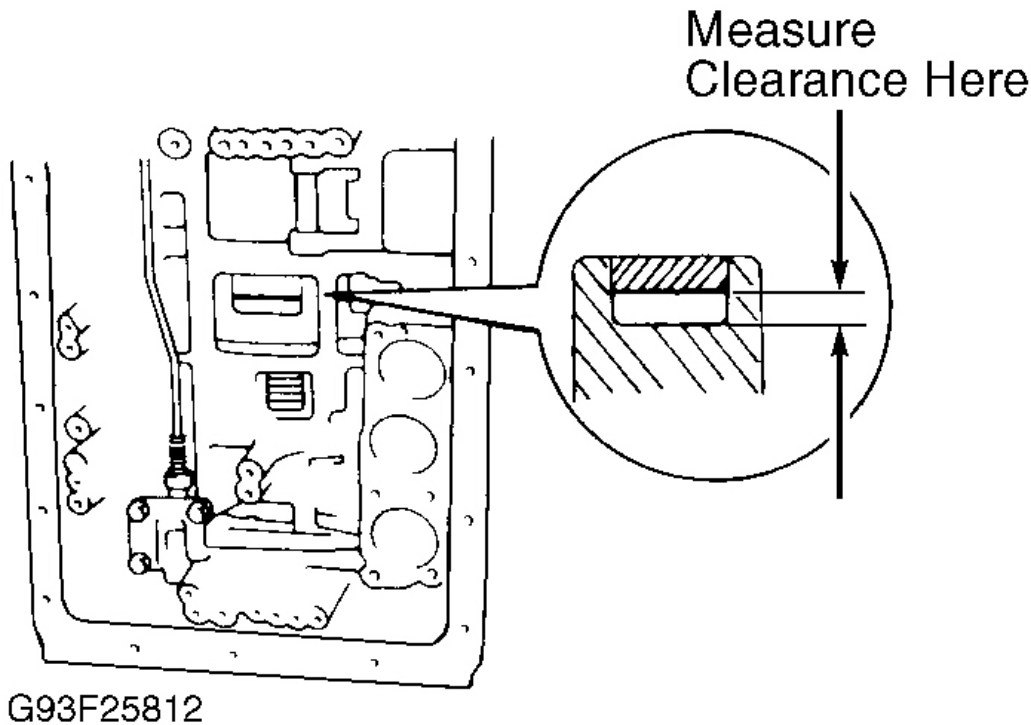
Measuring Input Drum & Rear Clutch Drum Clearance
